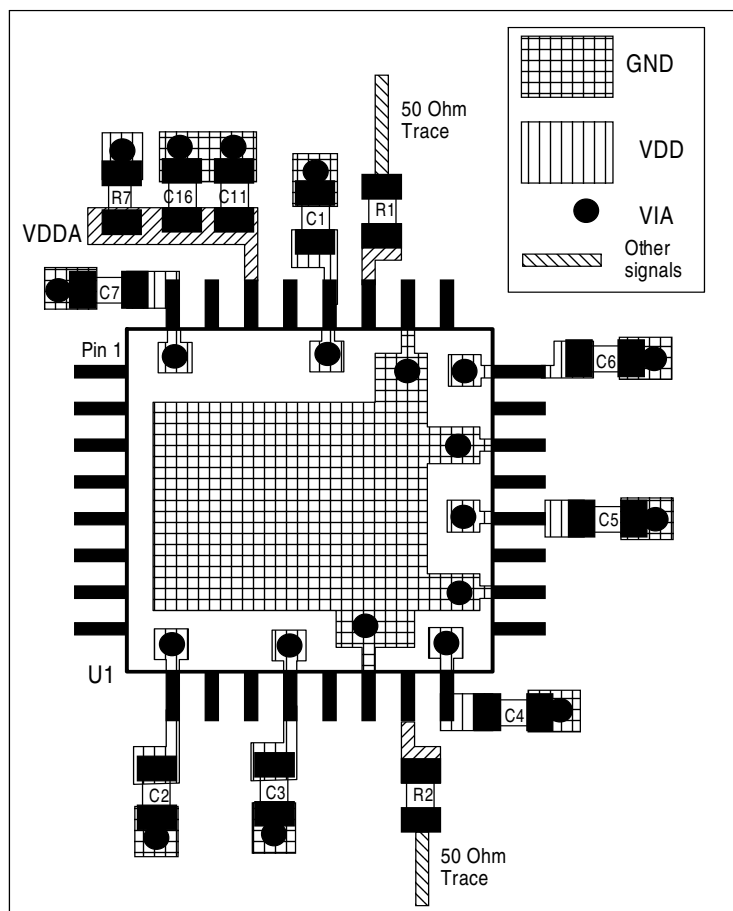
B. PCB BOARD LAYOUT FOR ICS8705
